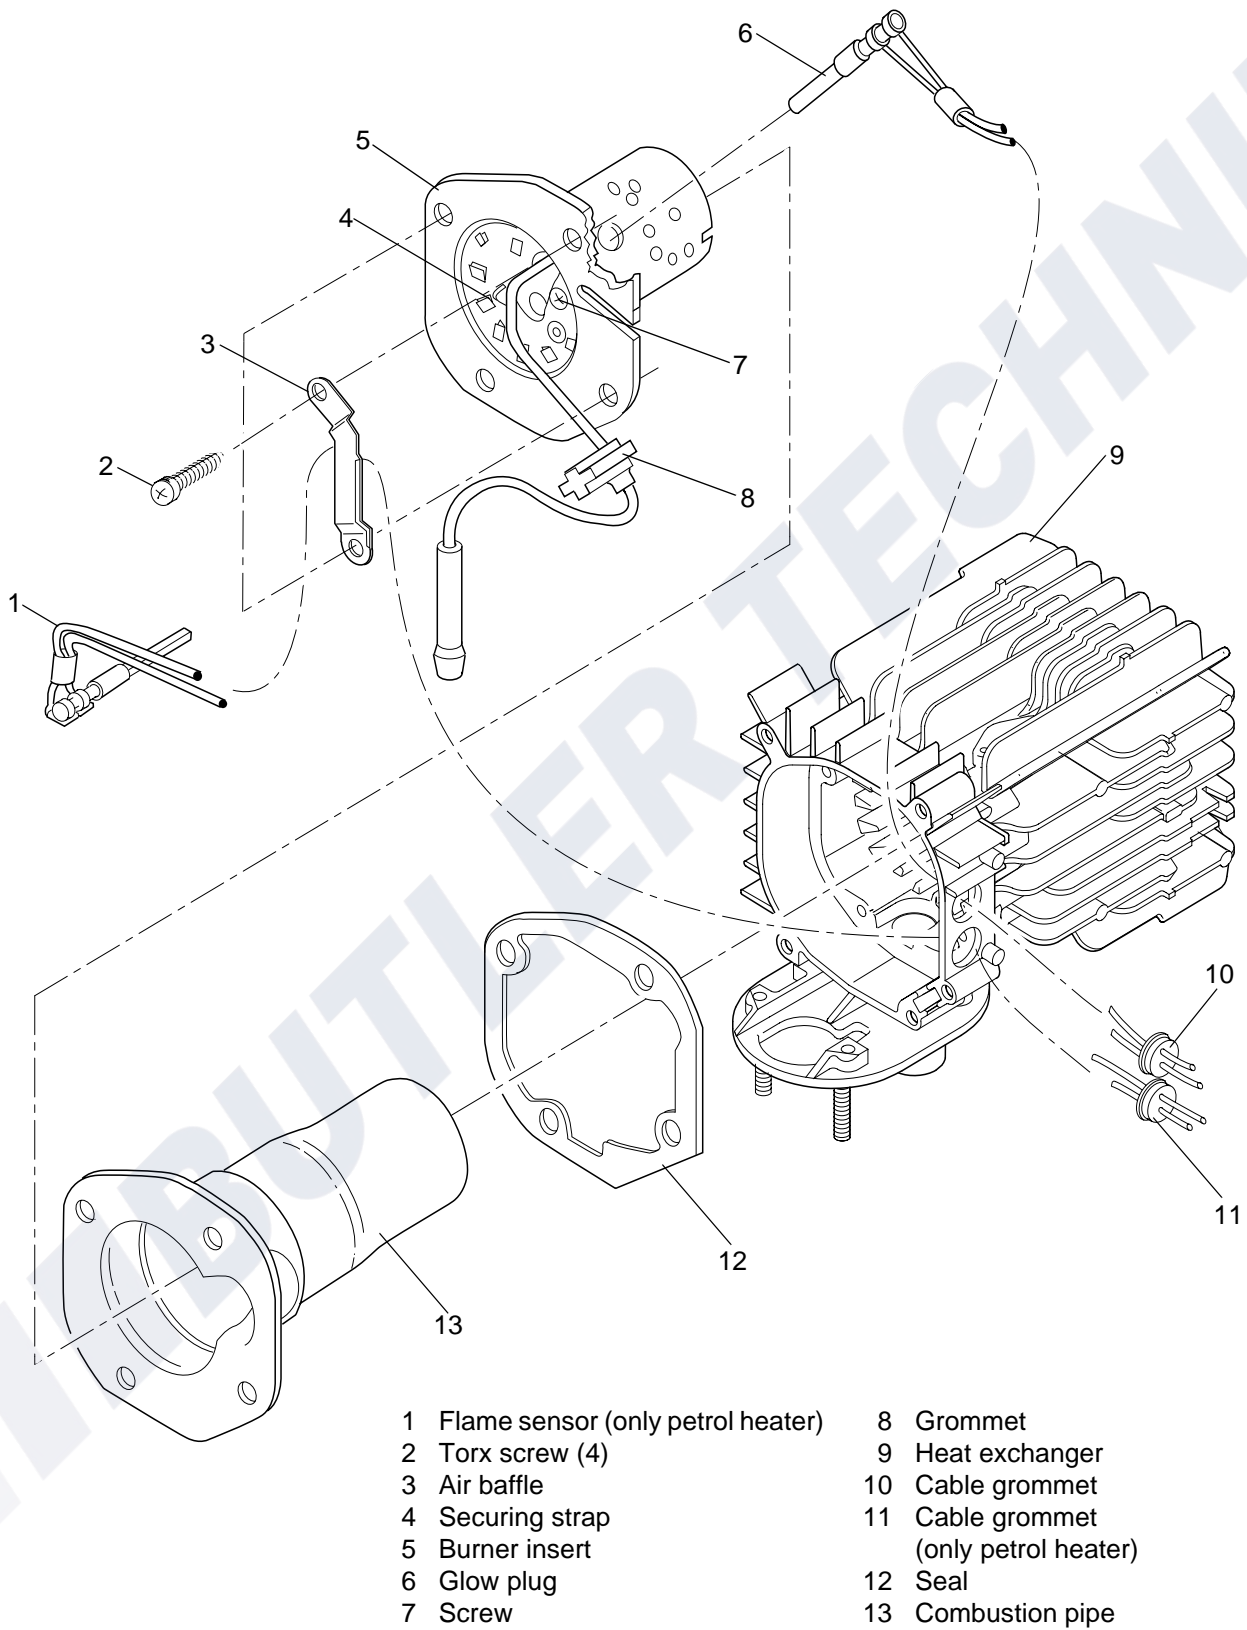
Change the glow plug, flame sensor, combustion insert and the heat exchanger
